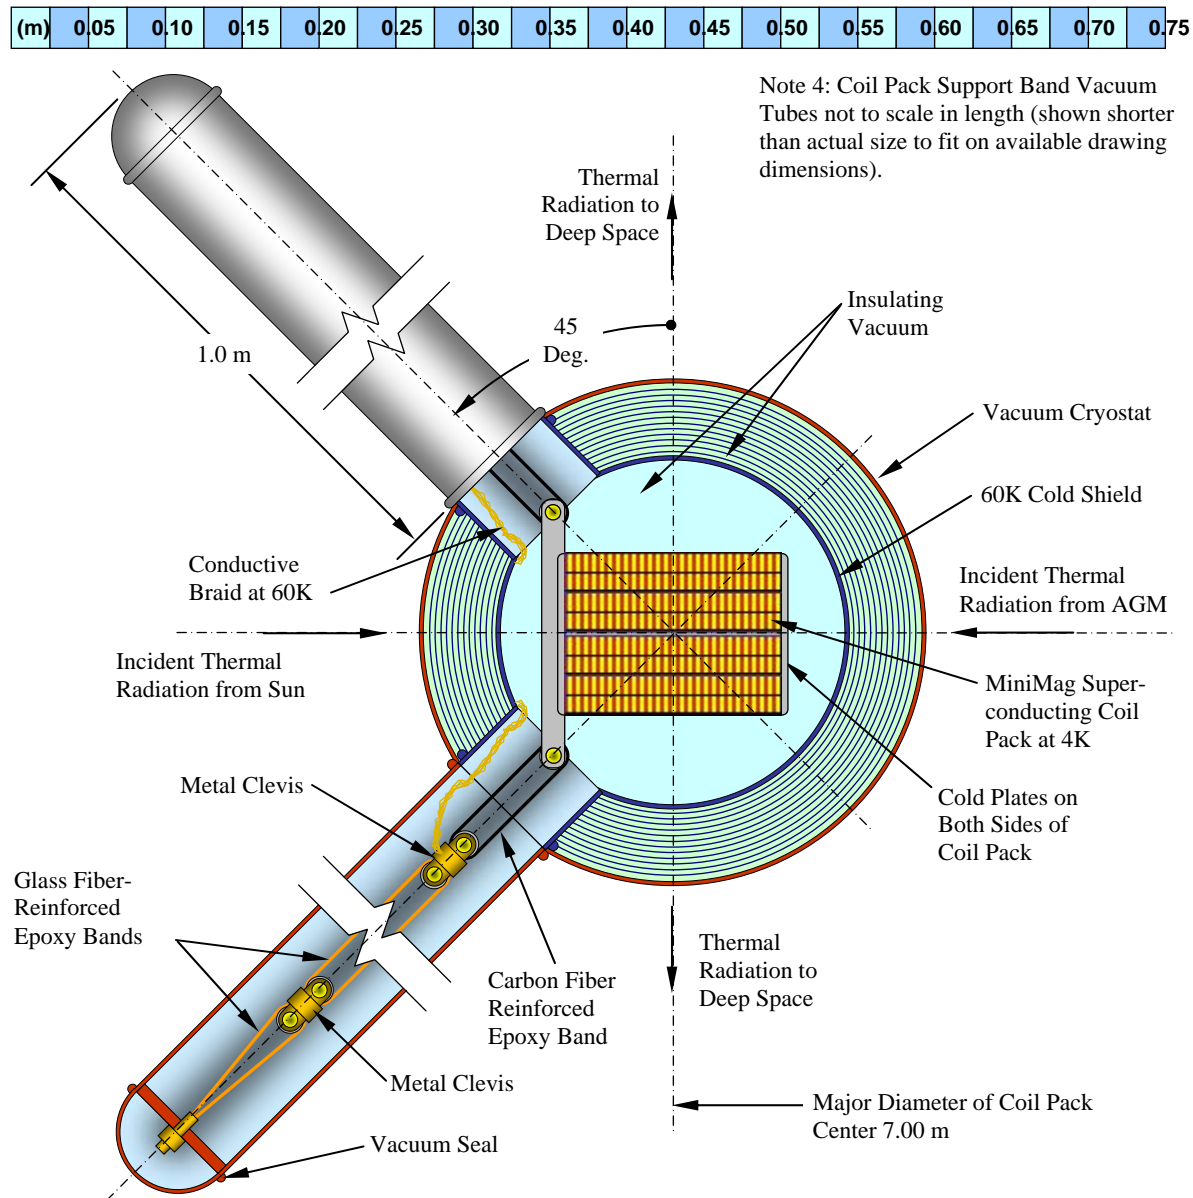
Mini-Mag Coil Cross-Sectional Details: Conductor Windings, Cryostat, Super Insulation, and Supports.
